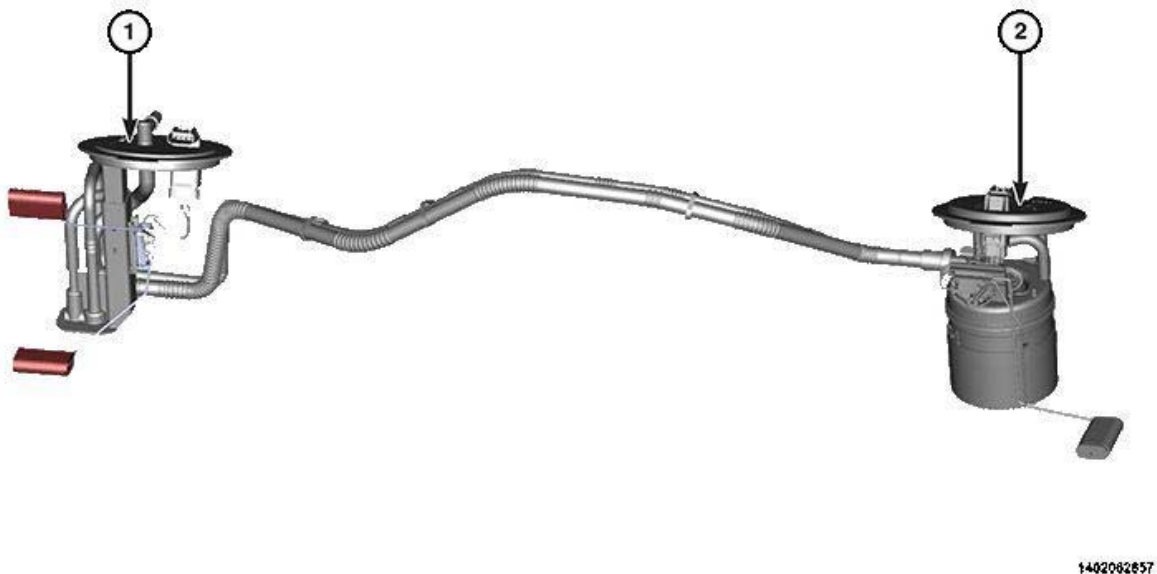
Auxiliary Fuel Pump Module & Main Fuel Pump Module
